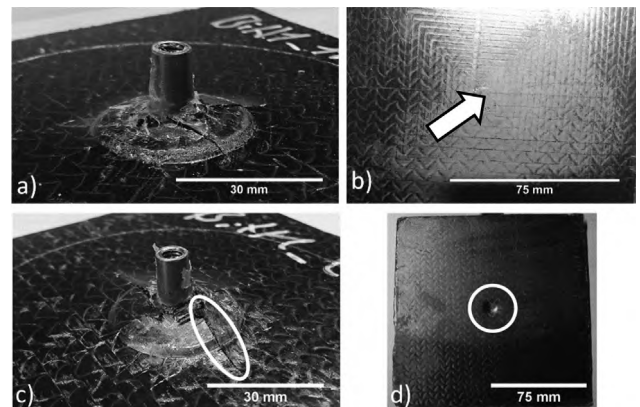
a) Failure at the upper side of a specimen pre-damaged by 6 J b) failure at the upper side of a specimen pre-damaged by 16 J (crack is marked) c) failure at the lower side of a specimen pre-damaged by 9 J (marked surface damages).
